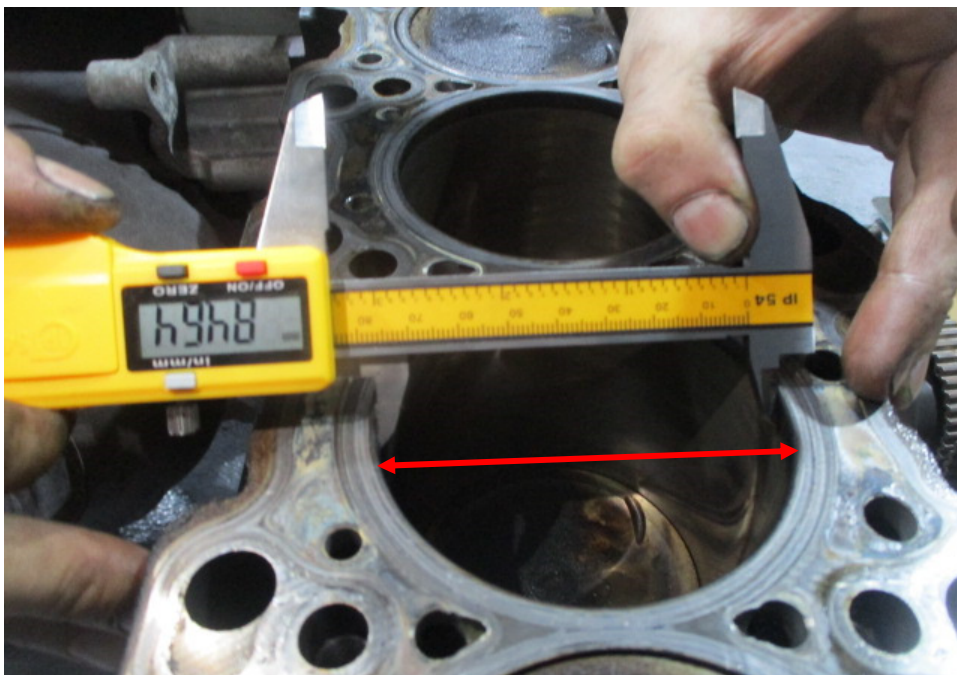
shows measurement being carried out to the bore (arrowed) of cylinder 3 of the Mitsubishi engine. The bore measurement of cylinder 3 was recorded to be 84.64mm.
